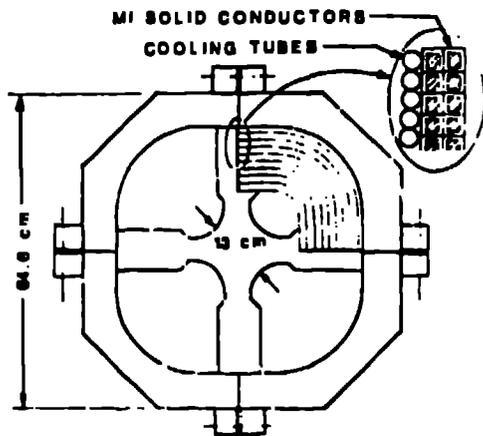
Magnet cross section showing MI solid conductors and cooling tubes. The magnet is designed for 4-fold symmetry and can be split readily on the horizontal centerline for remote access to the vacuum system.
